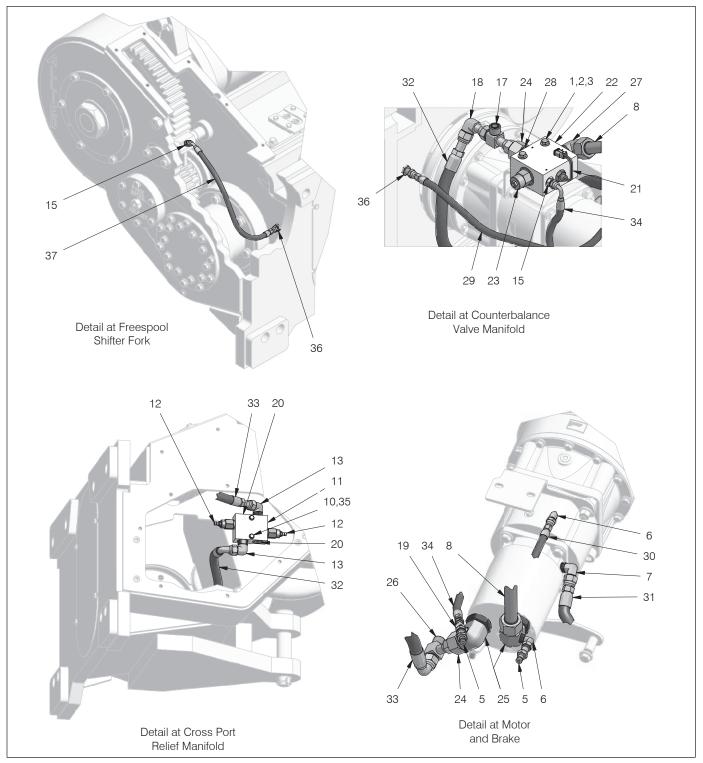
Hydraulic System Components, Rescue Winch_1
